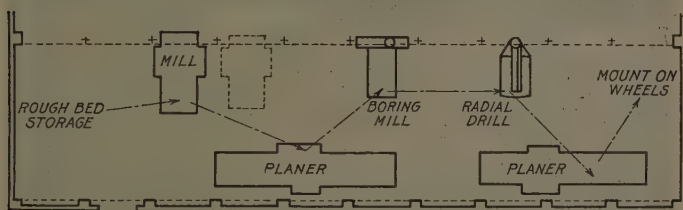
LAYOUT OF DEPARTMENT FOR BED MACHINERY
